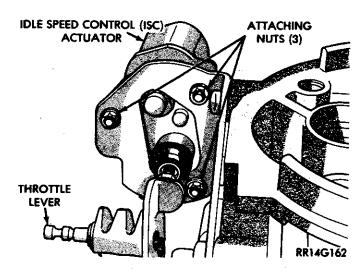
Idle Speed Control (ISC) Actuator Service Installation and Adjustment
